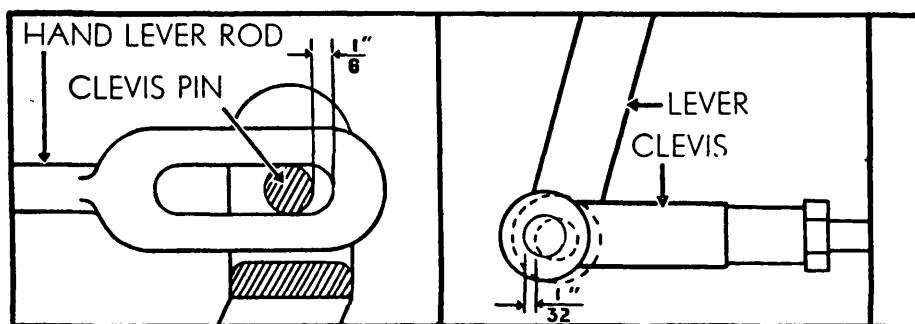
Pedal pull rod adjustment on Ford mechanical brakes
